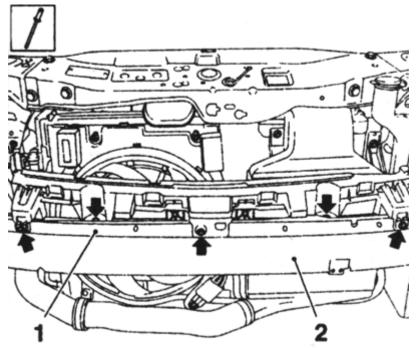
Secret rivets (indicated by arrows) attachment front direction rectifying to beam anterior Bumper:
